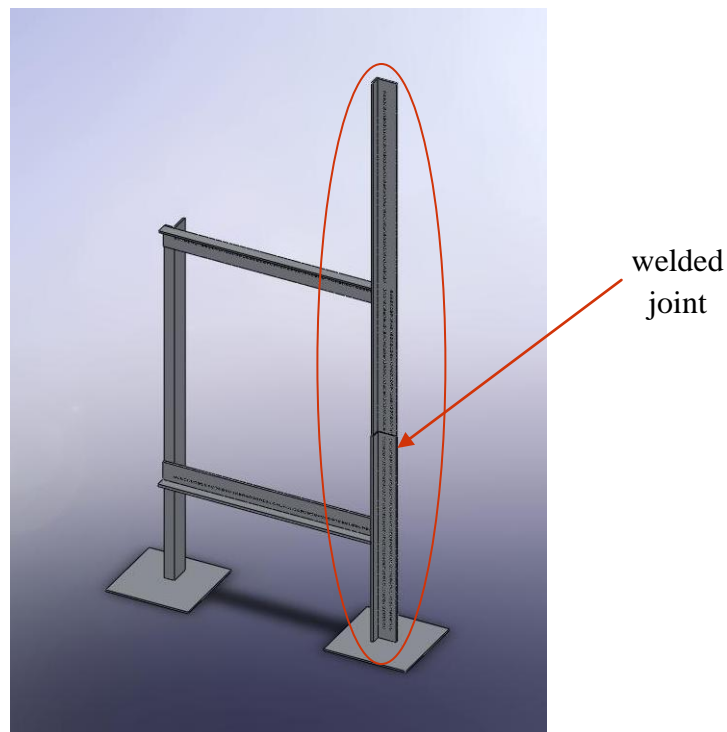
Image of a quadrant of our MTS prototype II highlighting a welded joint that could be eliminated.
